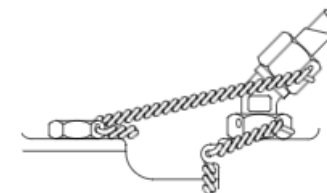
Lockwire Configurations and Alignment (Sheet 2 of 3)
